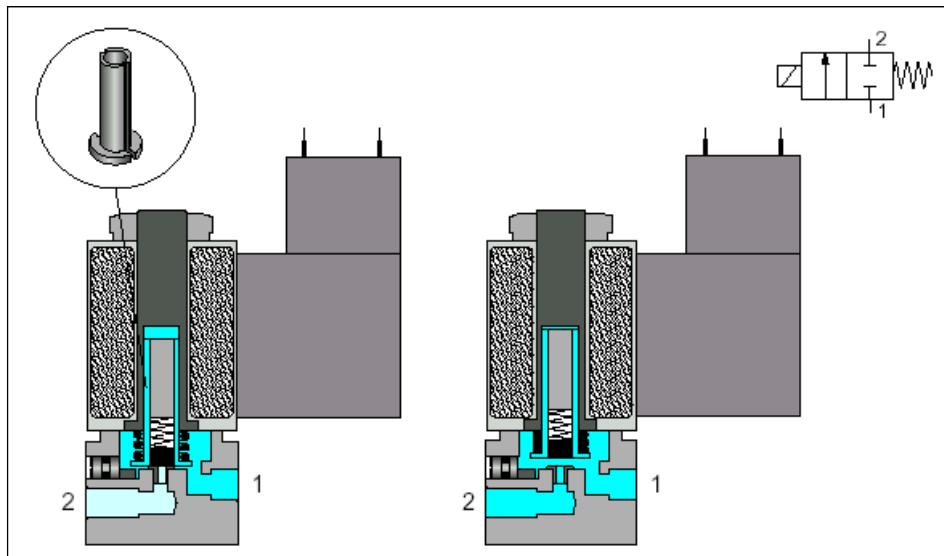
2/2-Way Single Solenoid Directional Control Valve
